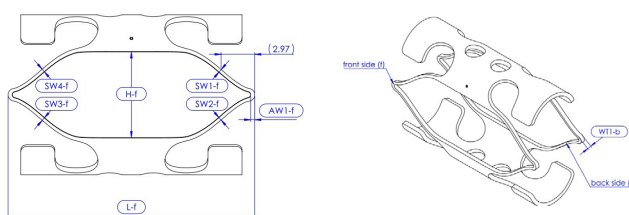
Diamond fatigue specimen for 7x0.5 mm tubing.
